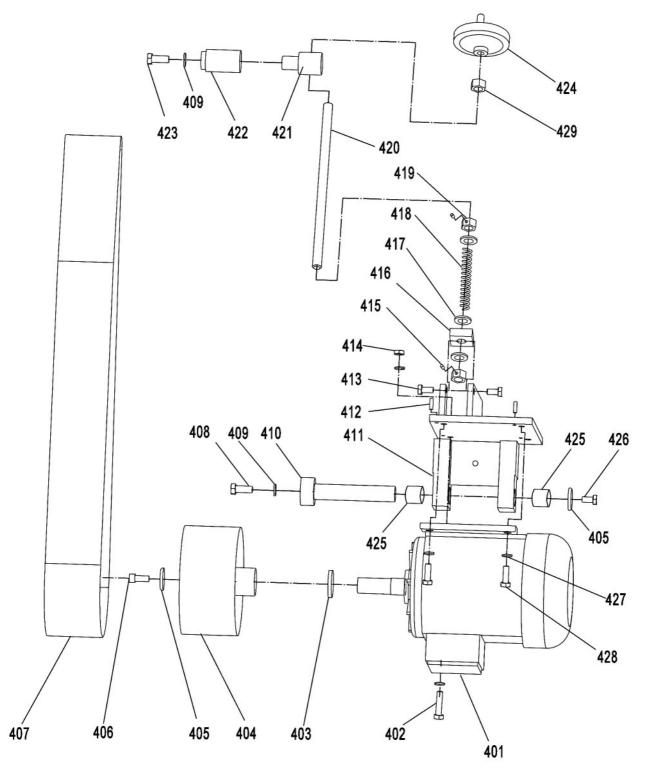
Spare Parts Drawing 4 KRBS 101
